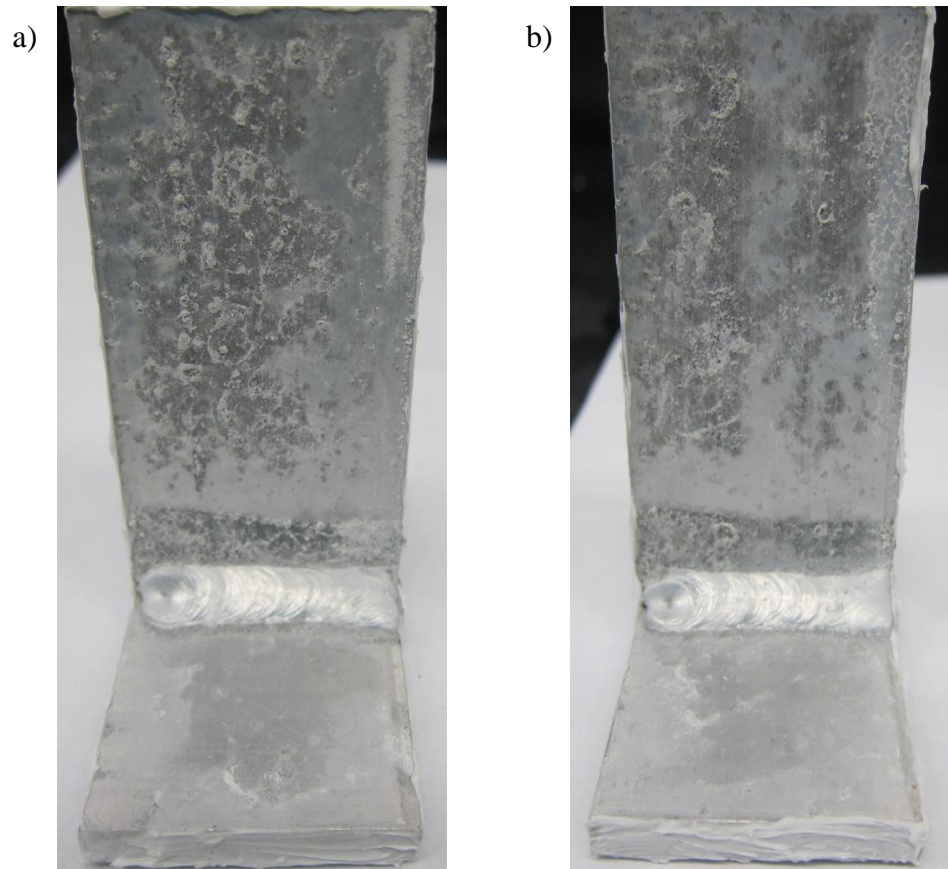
Duplicate samples of T-joint welded configuration F3 (ER5356/AA7108/L) in the as-welded T6+PB condition.
